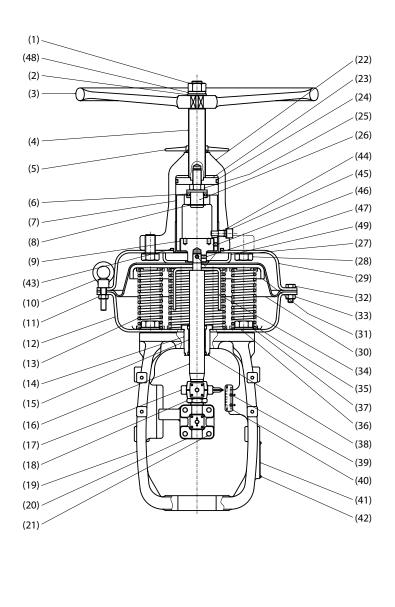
Model HA2/3 Actuator with Top Handwheel (Direct Action Type)
